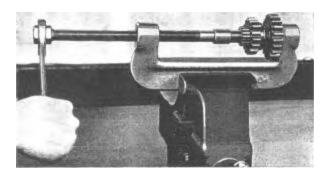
Installing Reverse Idler Shaft Bushings— J-488 Bushing Press and Adapter
